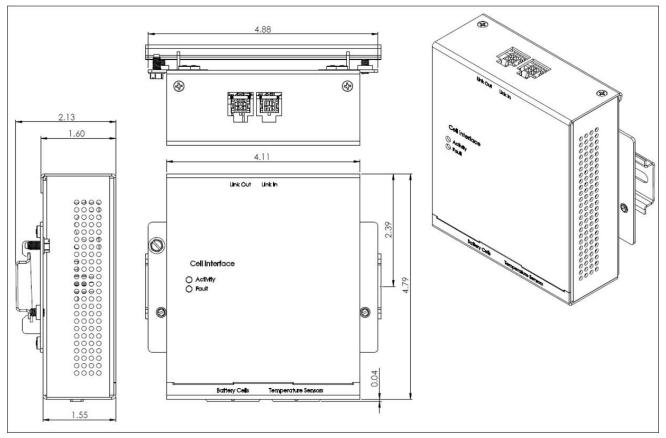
Mechanical Drawing of Cell Interface with DIN Enclosure (NRND)
